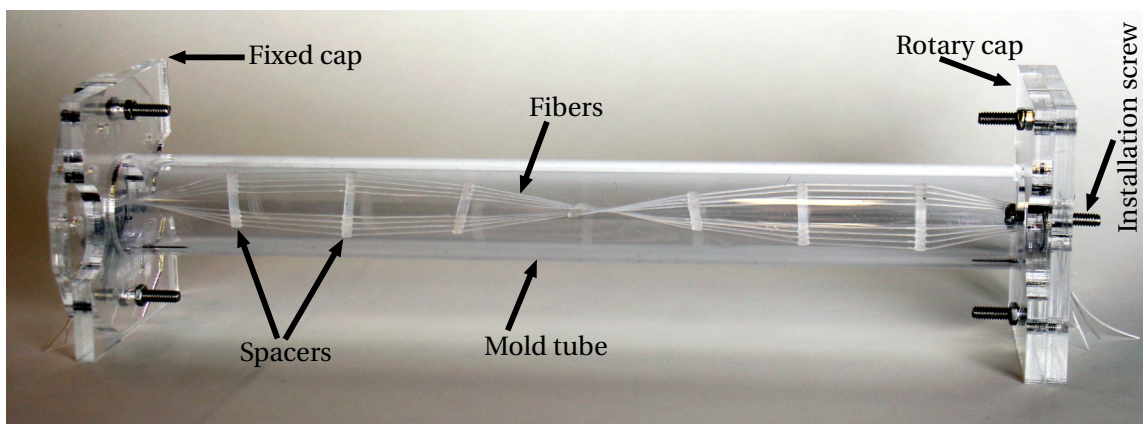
Photograph of the mold used to fabricate circular rods.
